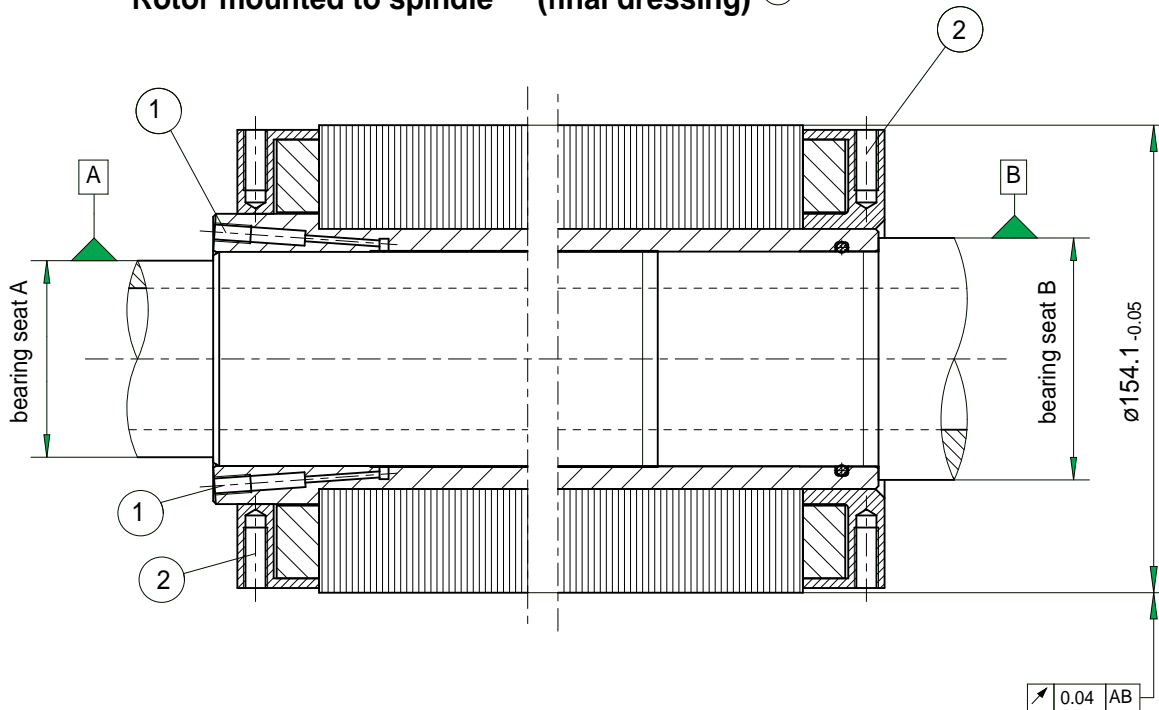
1MB 242 frameless spindle motor - dimensional data (part 2)
